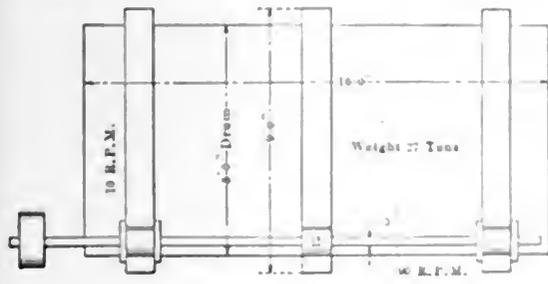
ARRANGEMENT OF DRUM AND ROLLERS
